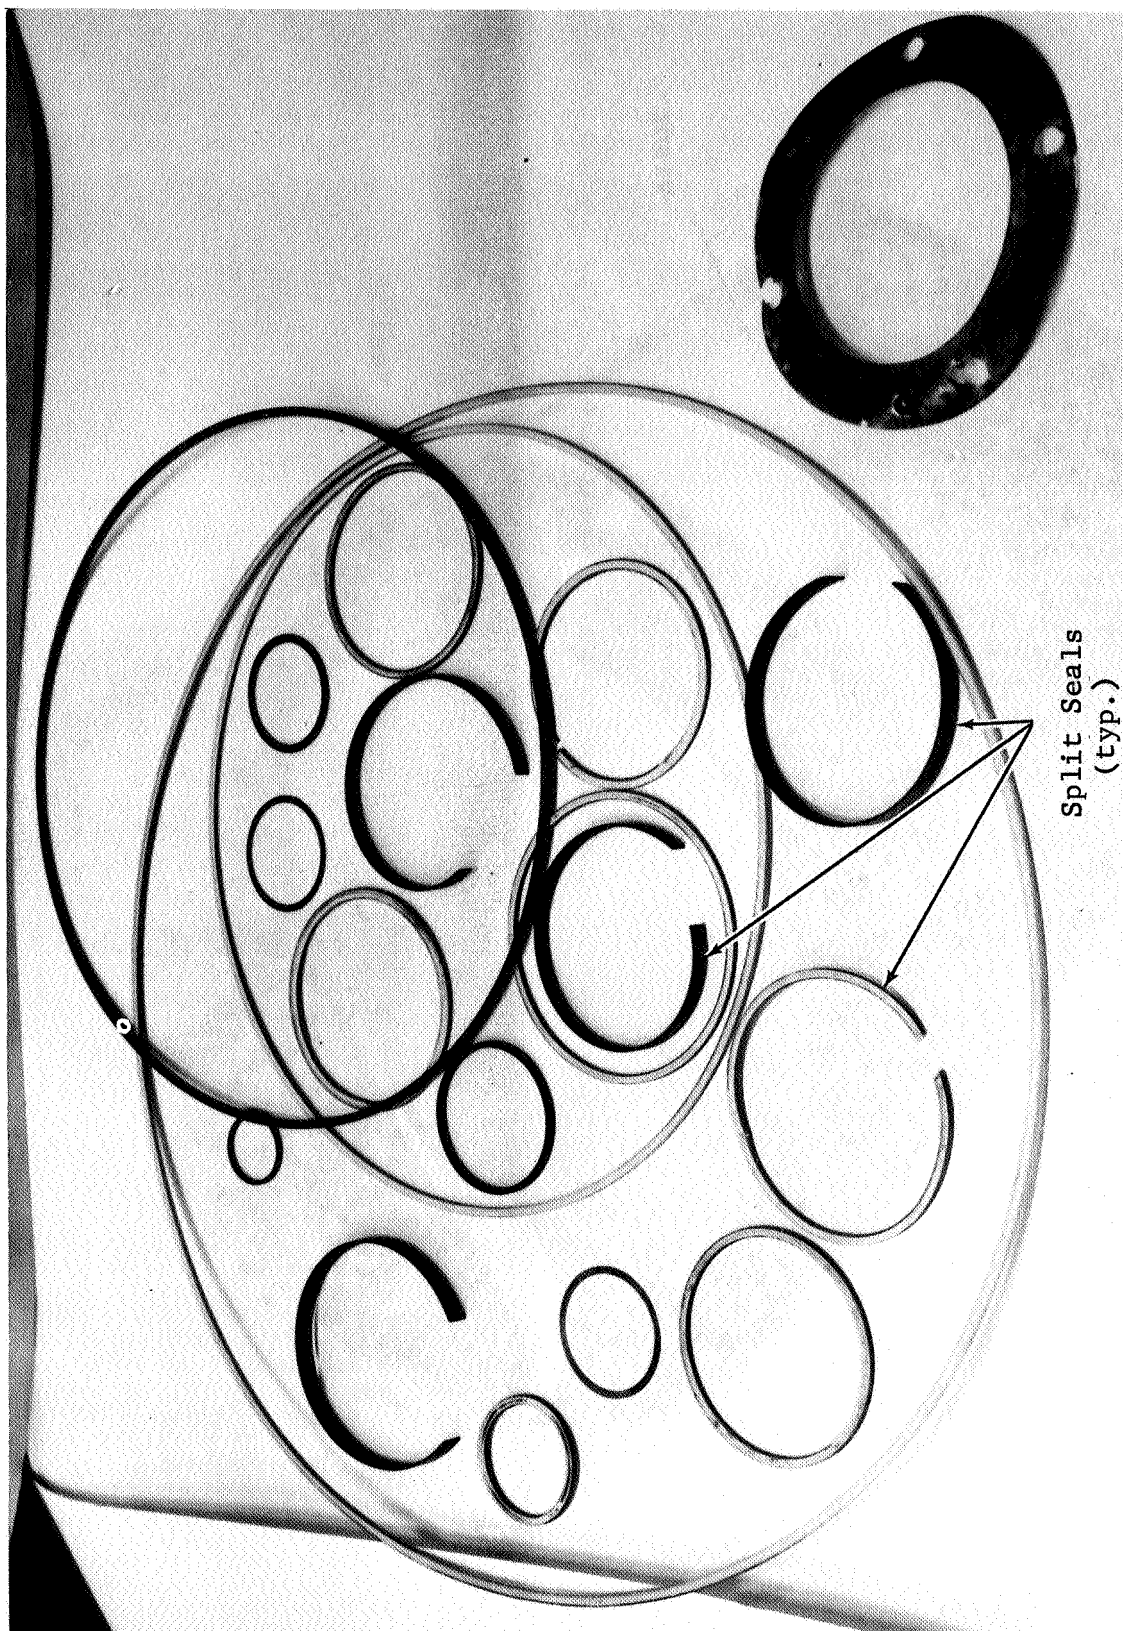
Other Seals from the 17-in. Valve after Irradiation
